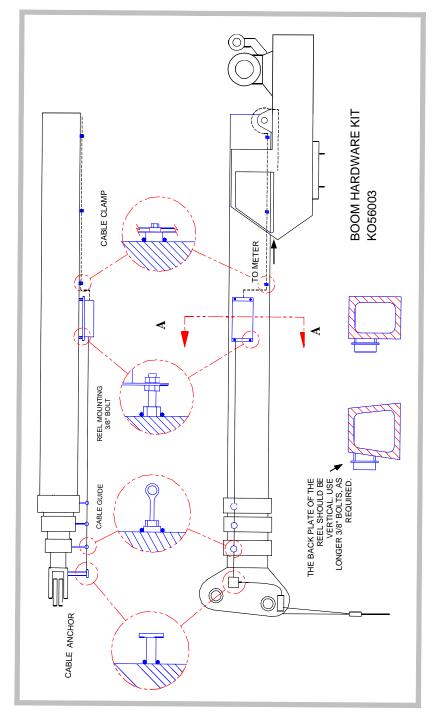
EXTENSION REEL ASSEMBLY FOR HYDRAULIC CRANES
